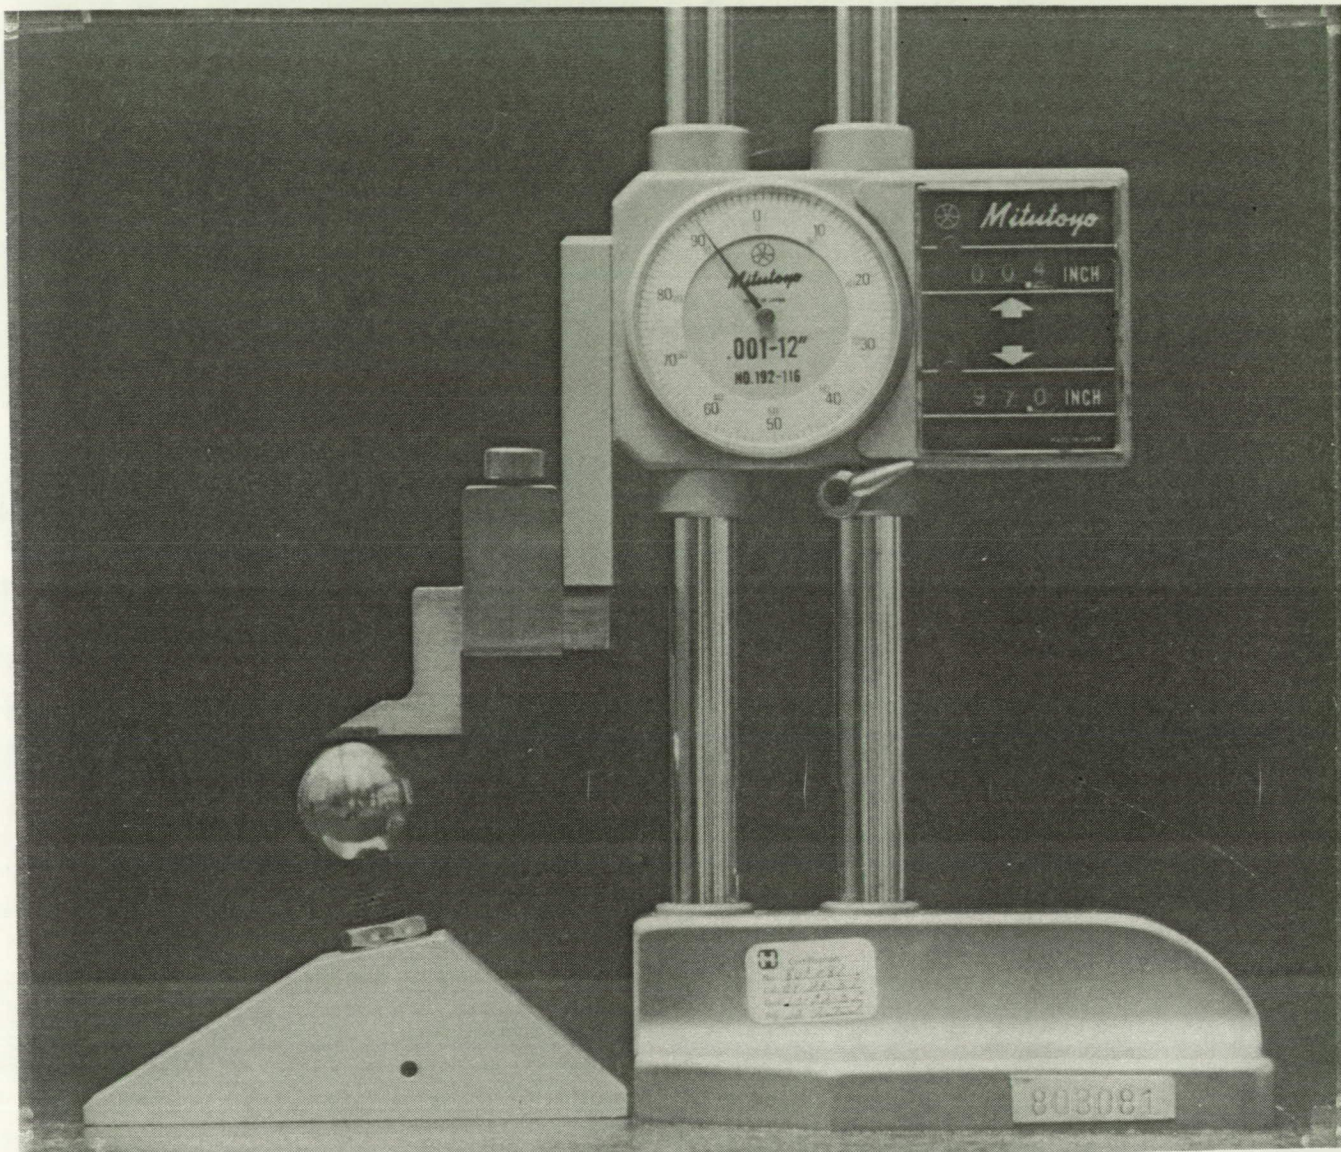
Striker Sphere Is Set Using A Modified Height Gauge Shown Above. The Height Is Set Per The Striker Assembly Drawing 500065.
